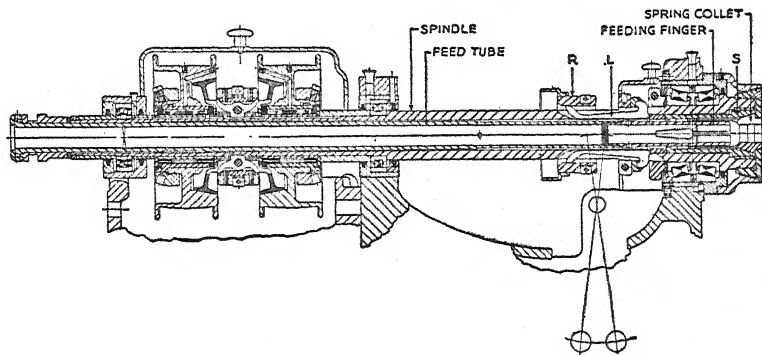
A Sectional Drawing through the Spindle of the No. 2 Brown and Sharpe Wire-Feed Motor-Driven Screw Machine.
